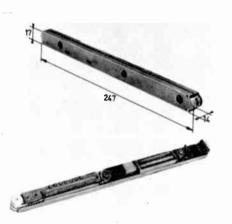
The SATCO electro-mechanical indicator. External view and with one side cover removed. Dimensions in millimetres.
